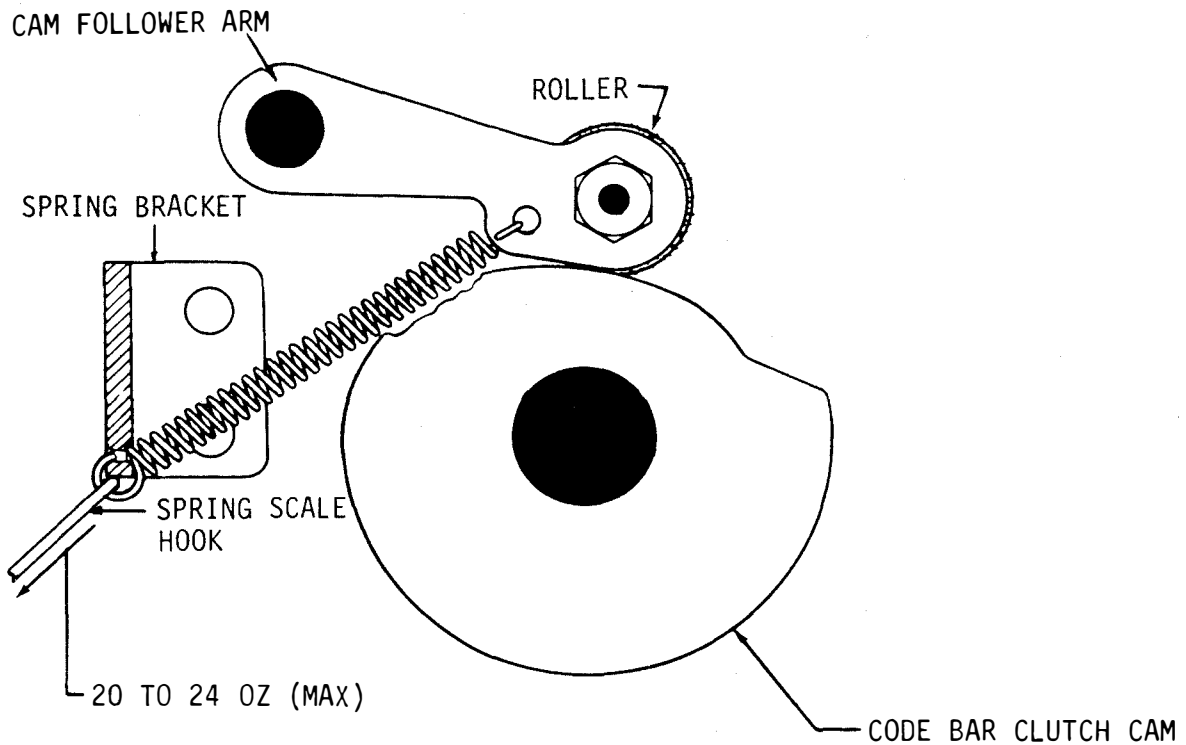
Code Bar Clutch Cam Follower Spring, Right Side View
